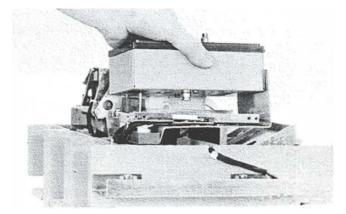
Aligning the Trip Unit on the mounting plate on 800- 2000 A Power Break breaker.
